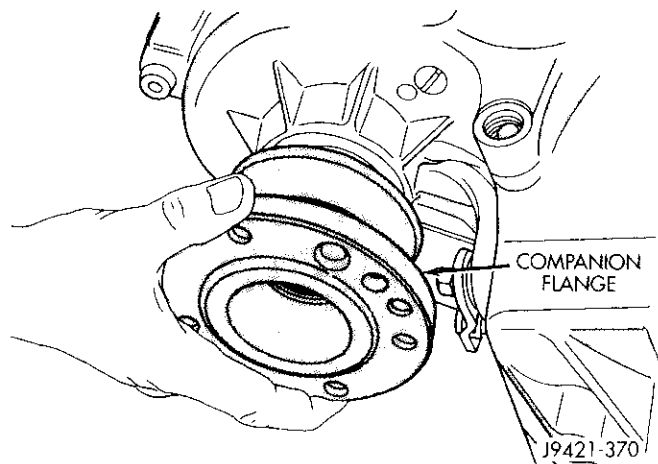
Installing Companion Flange On Front Shaft GEARTRAIN AND SHIFT COMPONENT
